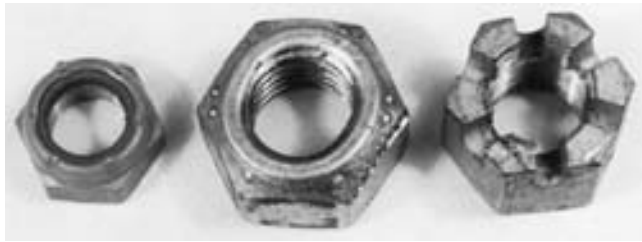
Types of lock nuts. On the left, a nylon ring; in the center, a distorted shape; and on the right, a castle for use with a cotter key.
